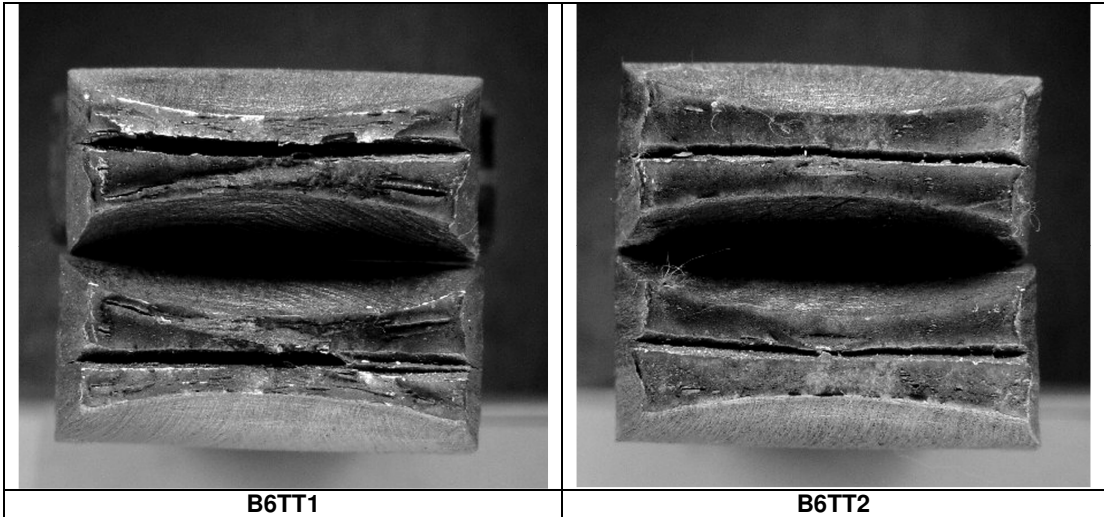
Fractographs of B6TT1 and B6TT2 specimens.
